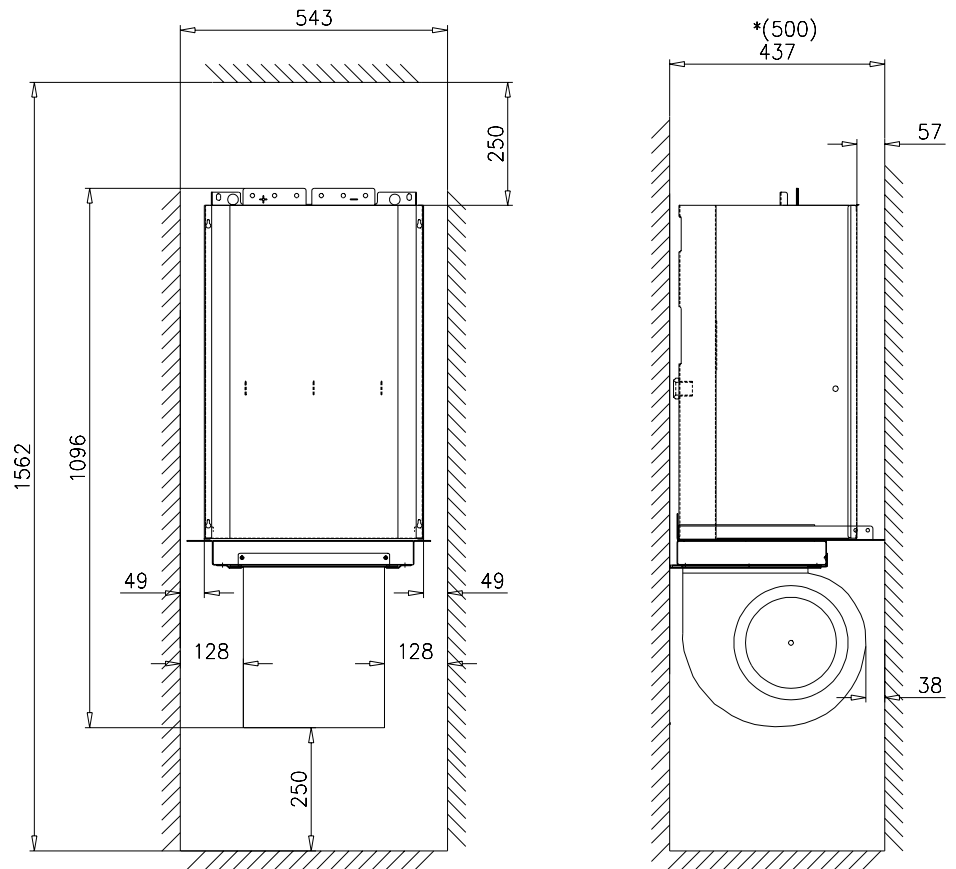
Cabinet layout example for R6i and R7i modules – Installation using the mounting plate/air baffle illustrated in Figure 2-43.
